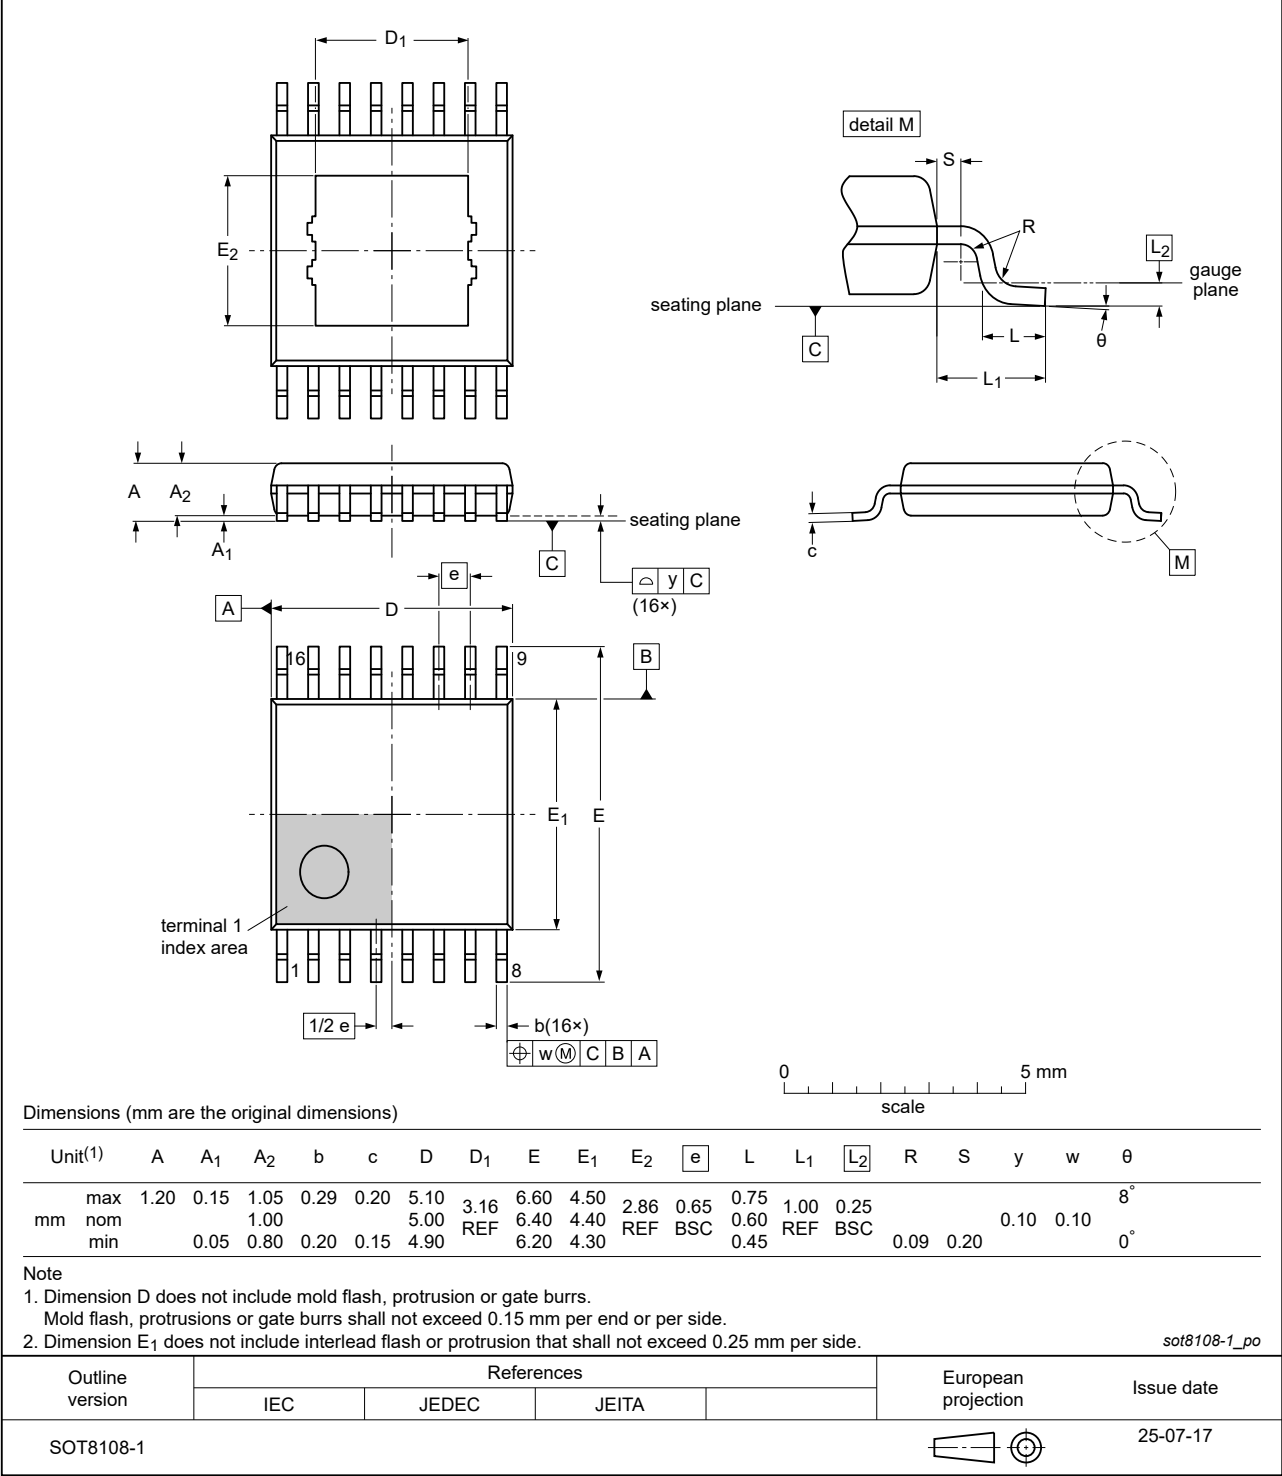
Package outline SOT8108-1 (HTSSOP16)
